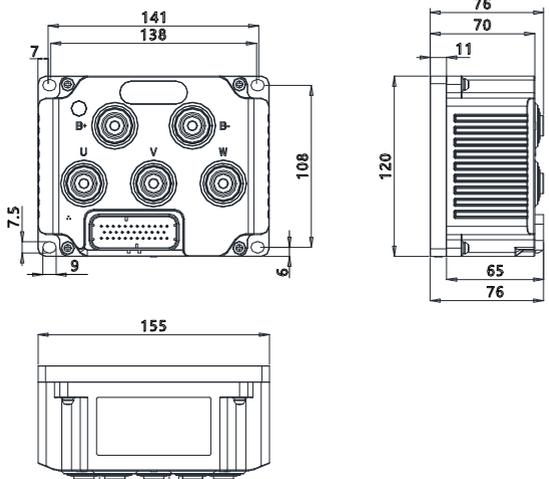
Outline, mounting dimensions of L630-2428-Z
